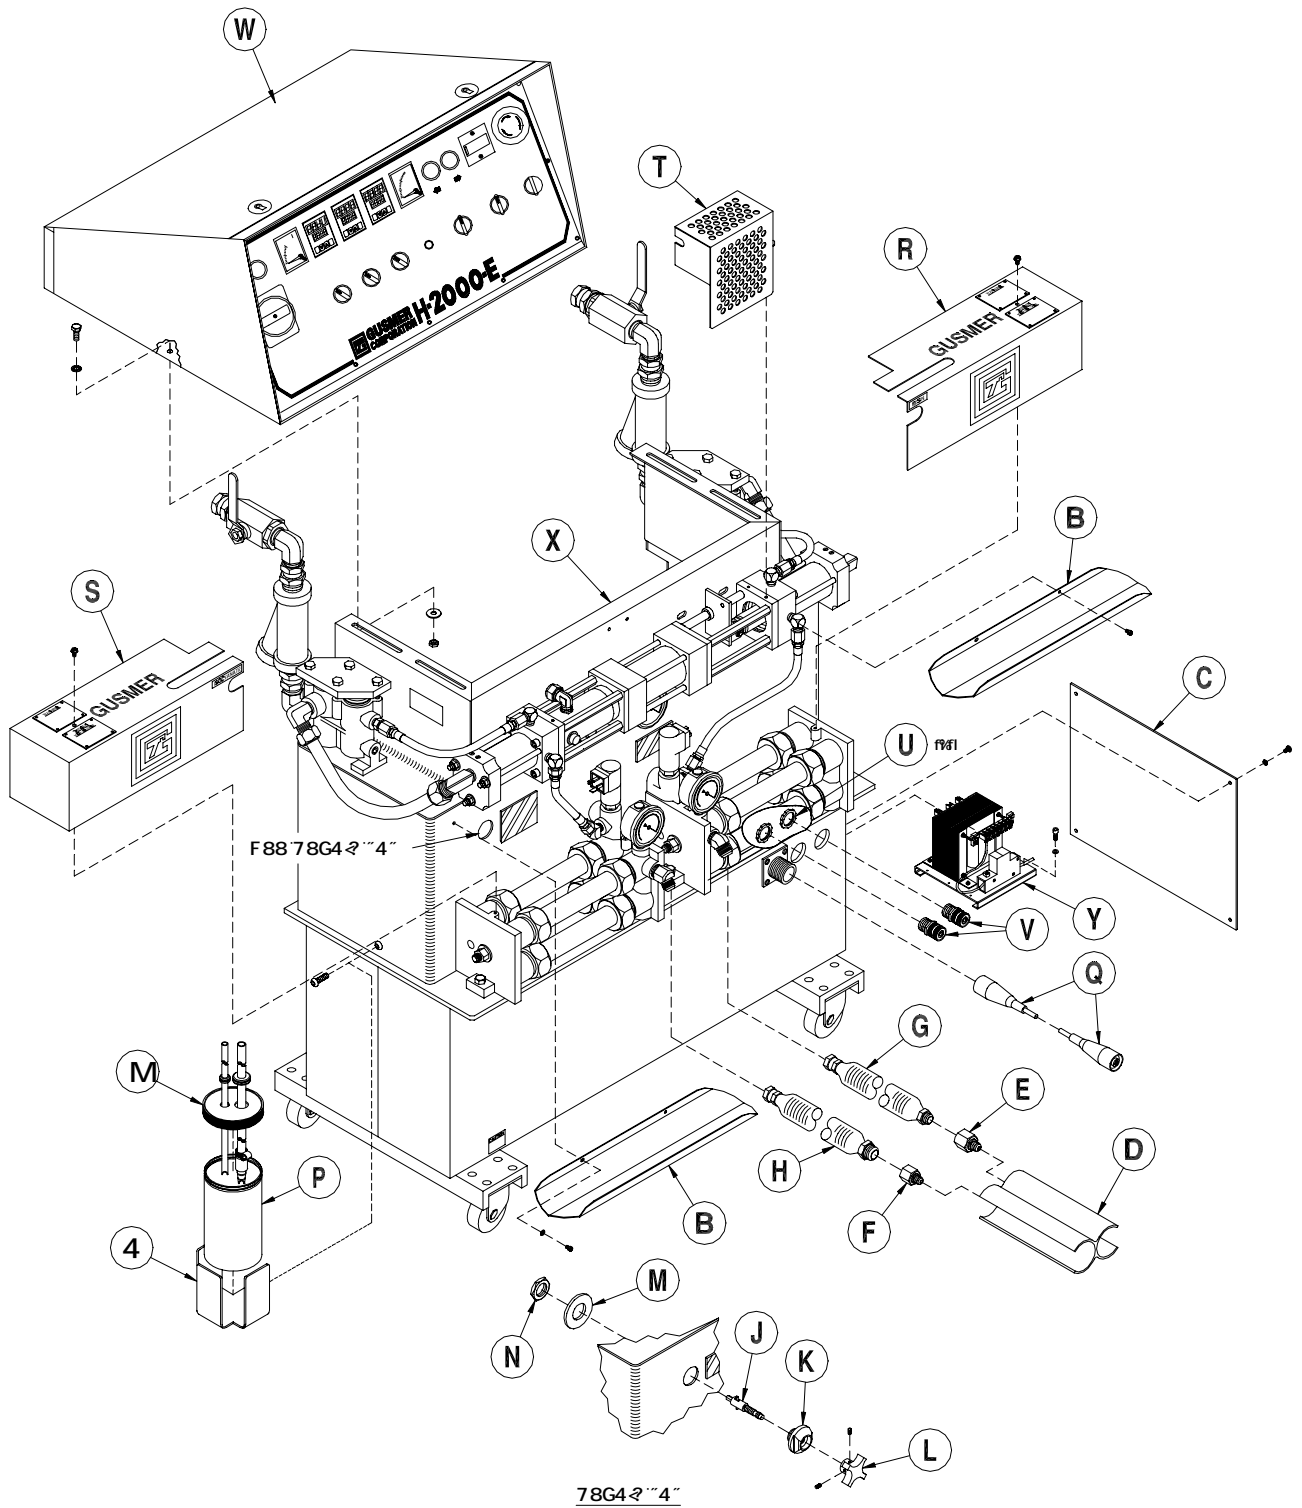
H-2000-E Assembly (Part No. 55000-SIZE-GE), Exploded View
